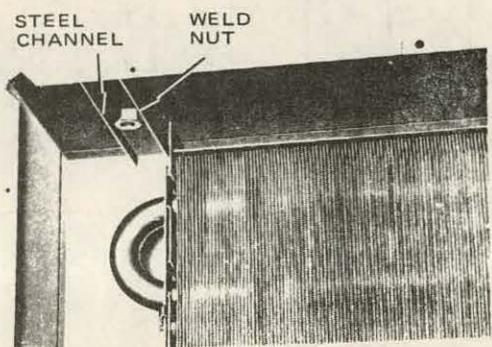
Model S Unit Mounting Channel and Weld Nut
